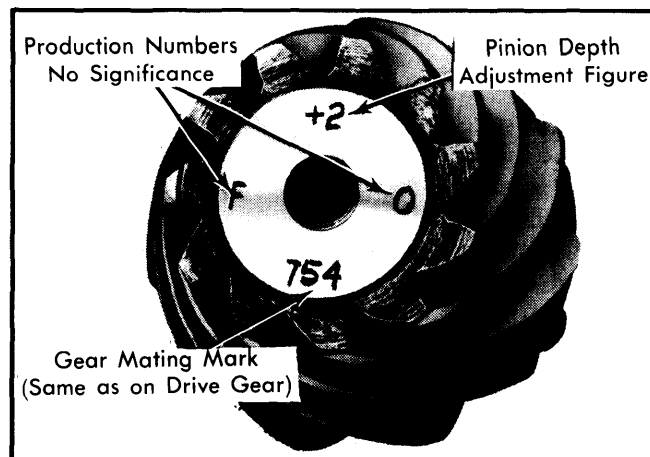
Pinion Gear Markings Showing Depth Adjustment Figure
